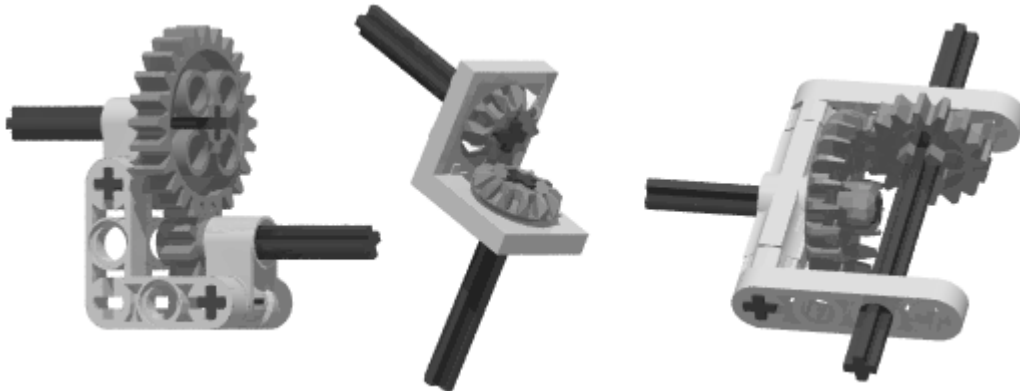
Gearboxes Don't Have to be Big to be Strong
